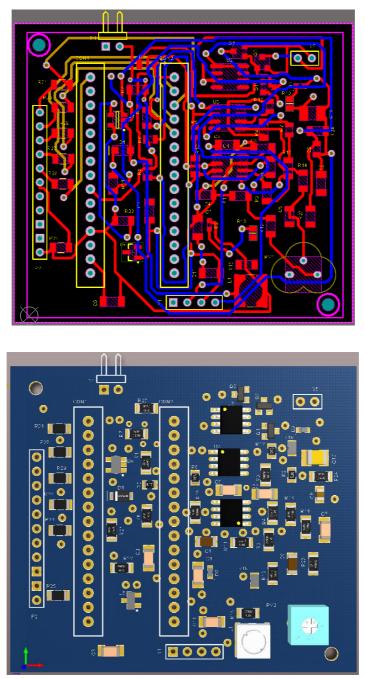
ALTIUM PCB DESIGN ROUTING LAYOUT AND 3D MODEL
